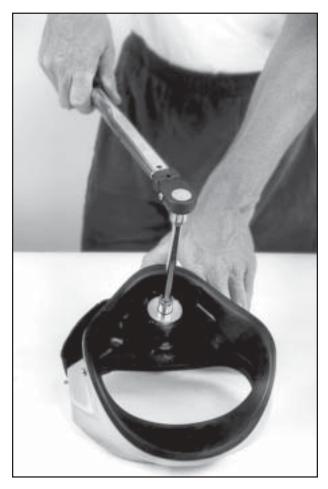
Use the proper socket to remove the regulator mount nut.
